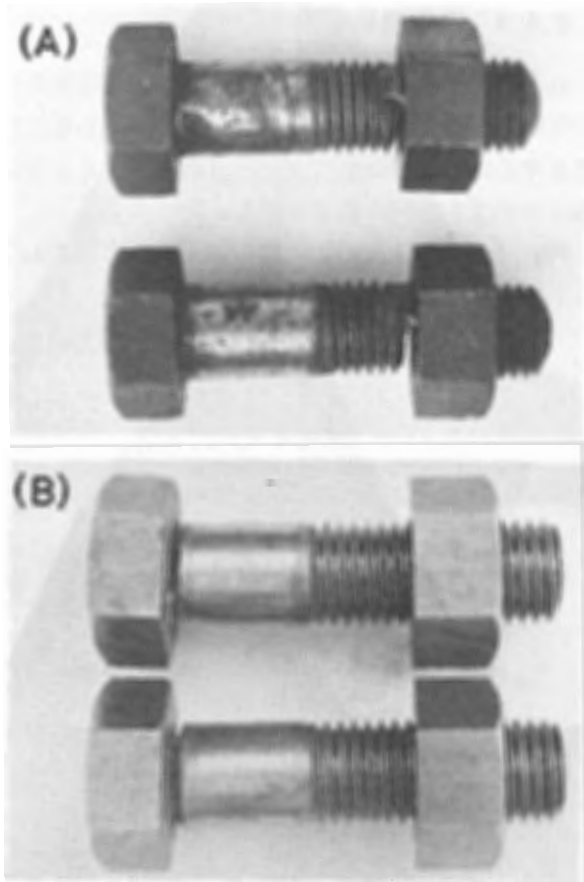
Fatigue fracture appearances of bolts, showing failures from threads (A) and from head-to-shank section (B).
